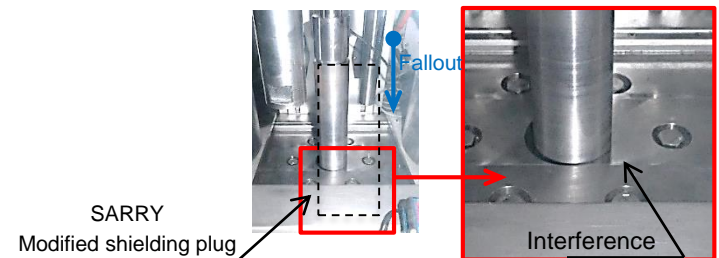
Interference of the SARRY modified shielding plug with the bottom plate of the ISM
